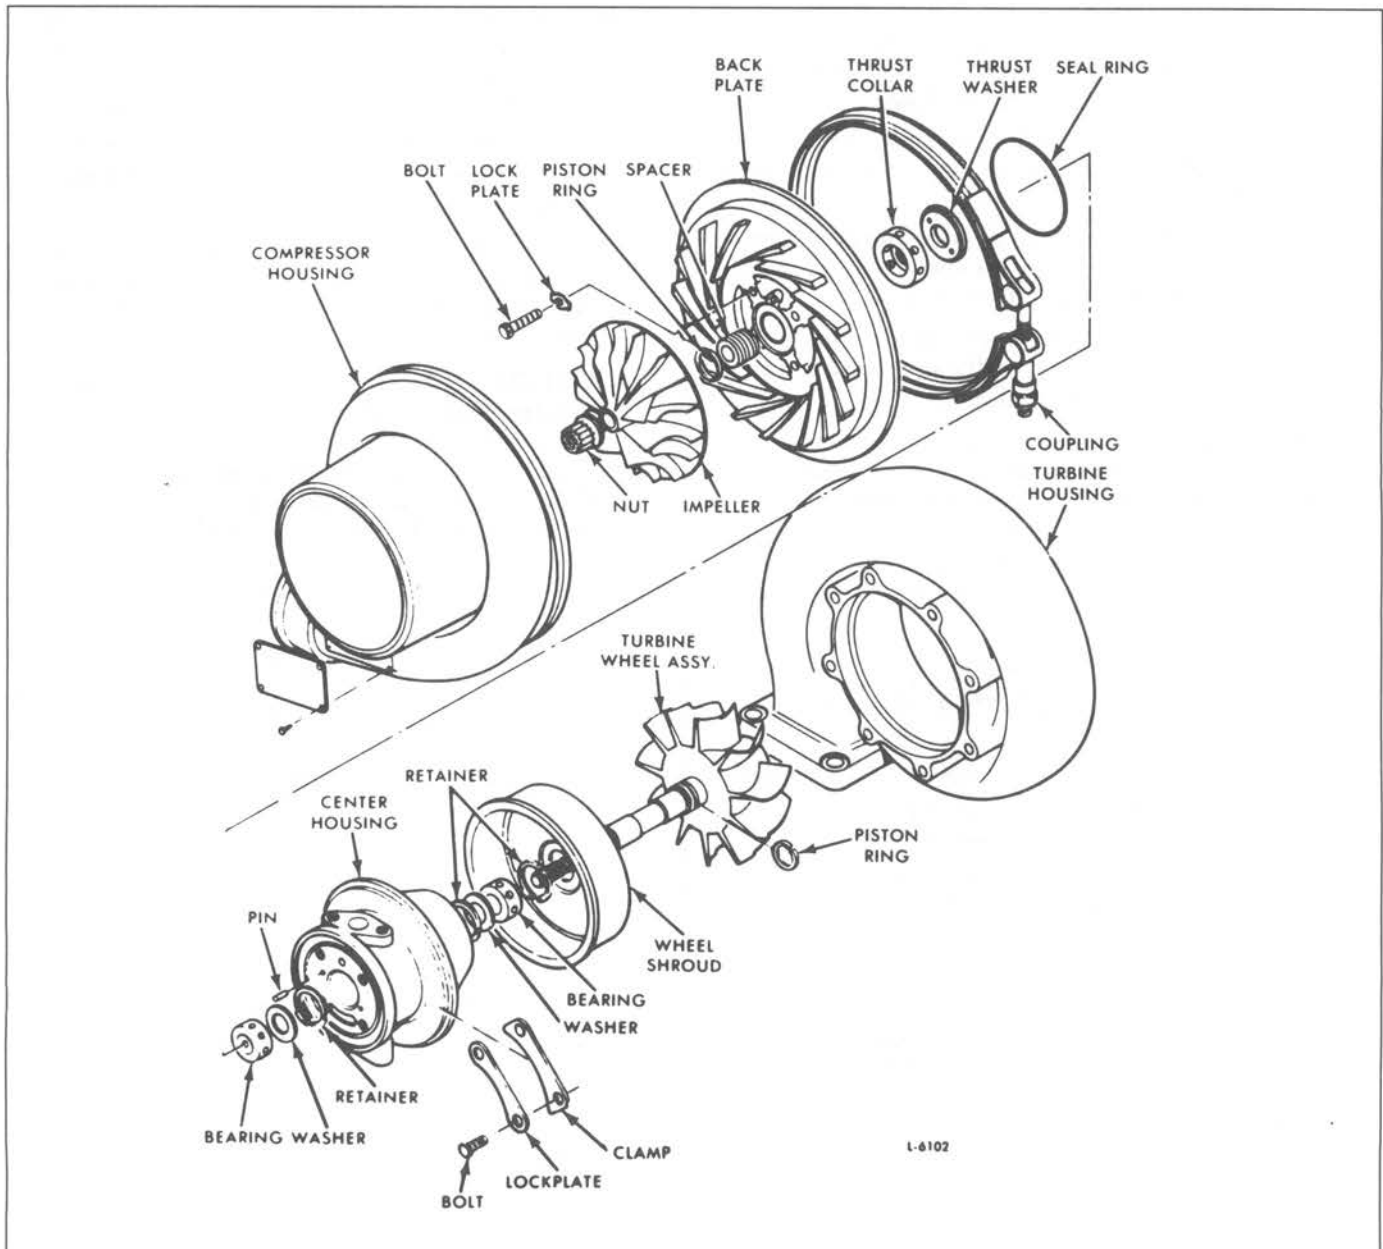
A - TH08A Turbocharger Details and Relative Location of Parts
